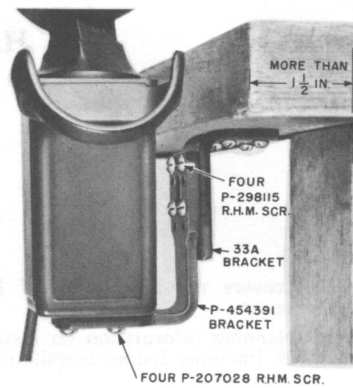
Hanging-type Hand Telephone Set with Handset at Left of Mounting
